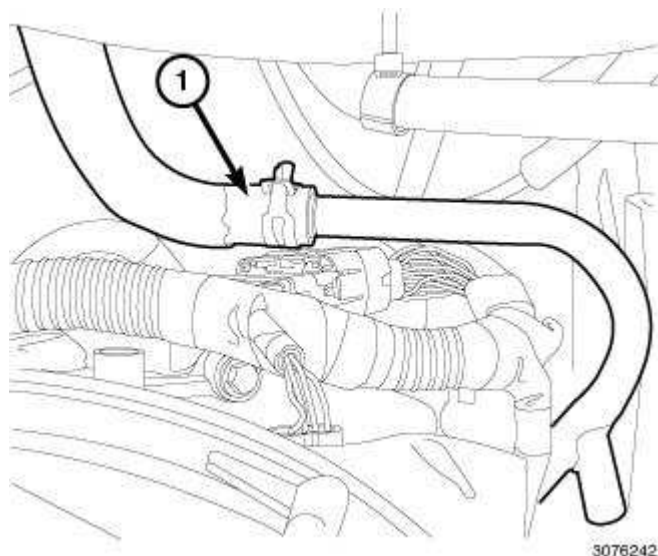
Heater Core Purge Hose, Coolant Bottle Retaining Bolts & Coolant Bottle
